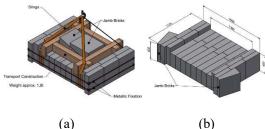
(a) Prefab slag door with lifting slings, (b) with jamb bricks set in place.
